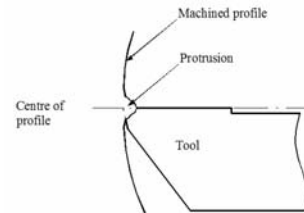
A protrusion is created at the centre of the machined profile as a result of fracture at the tool edge
